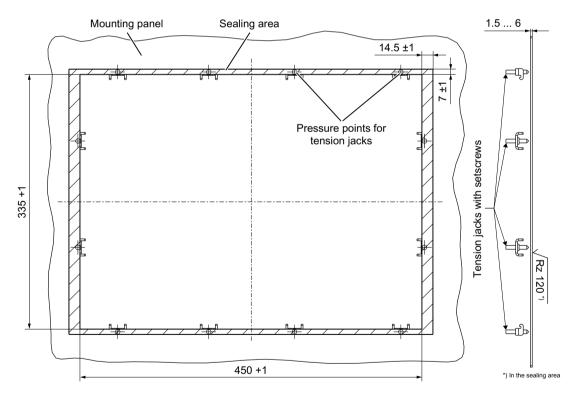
Dimension sheet for mounting the TP 015A operator panel front
